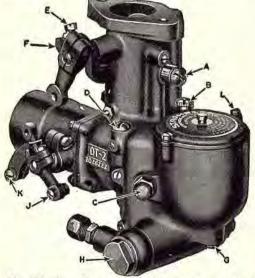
A. Stromberg type OT plain-tube carburetor. A vertical, single control carburetor.
